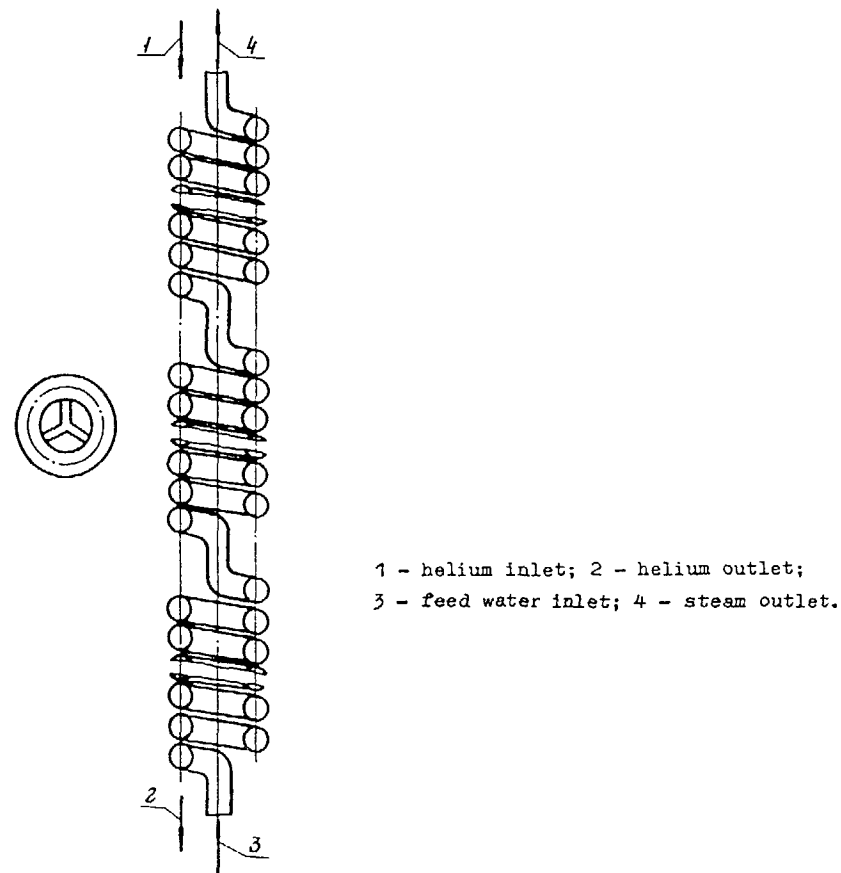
VG-400 Steam Generator Heat Exchange Element.
